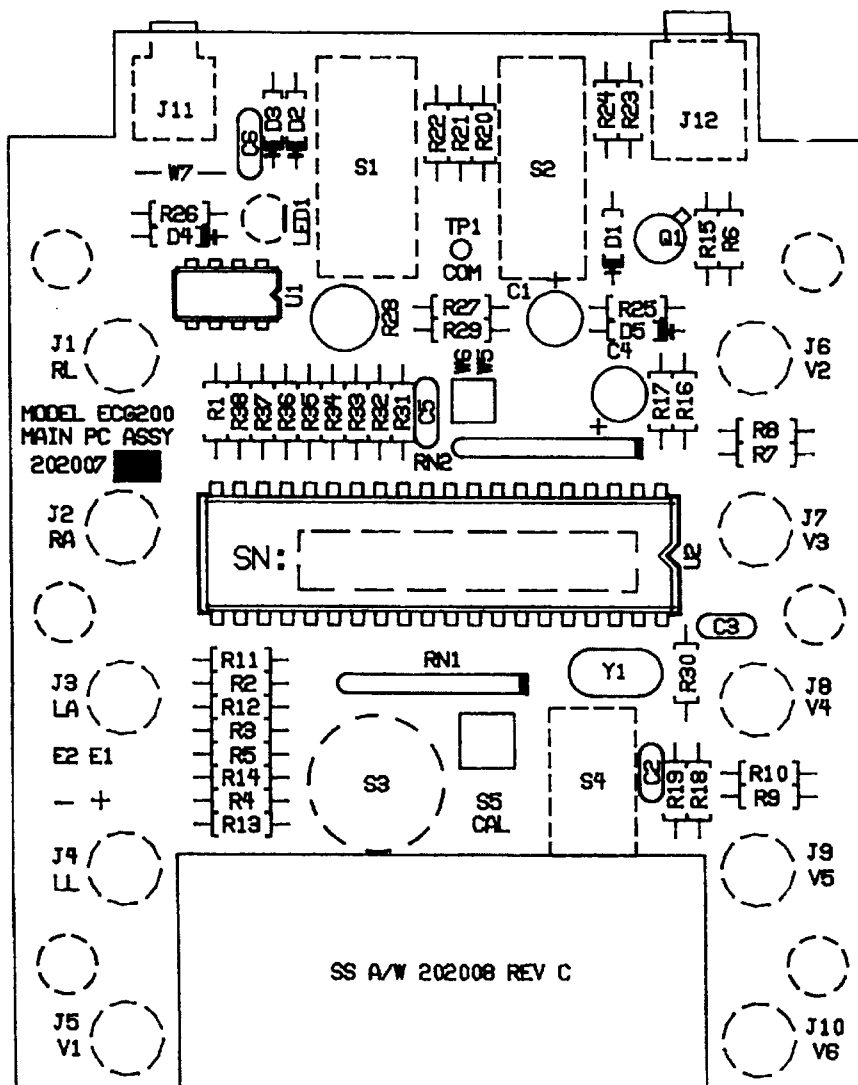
Printed Circuit Board Component Locator – Rev. C
